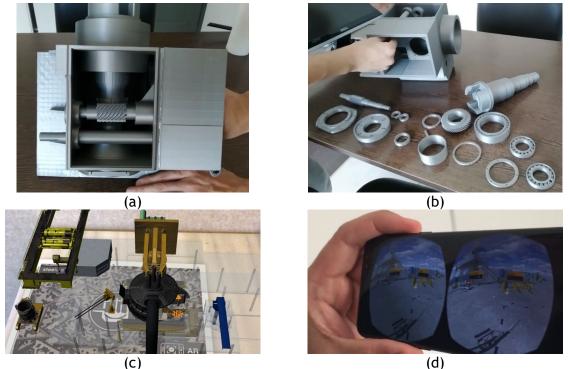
Threading Machine Model: (a) and (b) 3D printing plastic model, (c) AR of Electric Arc Furnace and (d) VR environment for risk identification
